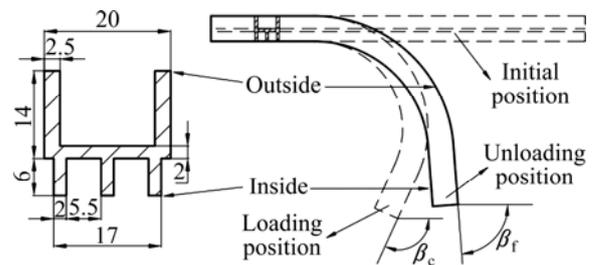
Cross-section and geometric dimensions of springback (Unit: mm)
